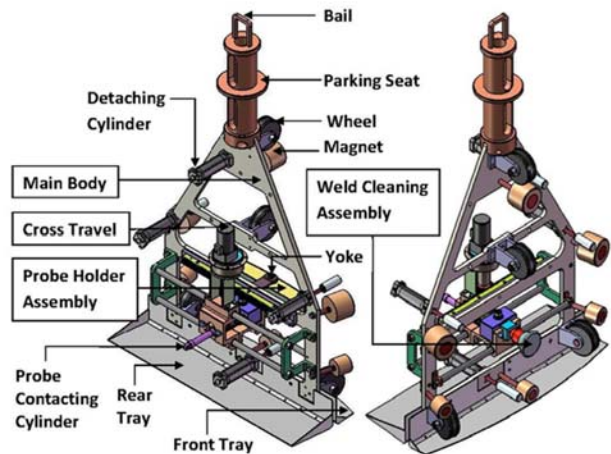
CAD Model of Weld Inspection Manipulator
